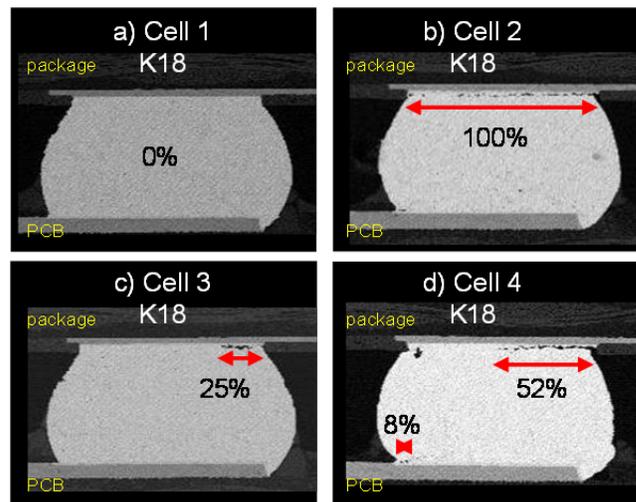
Cross-section of typical 512TEPBGA row K (under die edge) solder-joints after 3164 cycles. a) SAC387 0.5mm, PCB pad, b) SAC387 0.4mm, PCB pad, c) SnAg, 0.5mm, PCB pad, d) SnAg, 0.4mm, PCB pad,. All with 11mil thick die.
